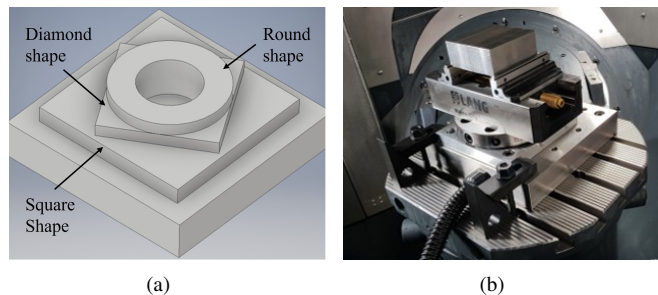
(a) A CAD drawing of machining features and (b) view of the experimental setup.
